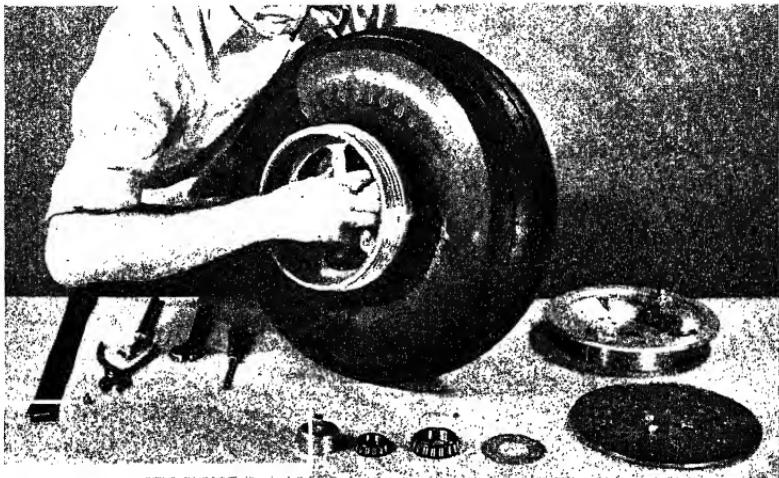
Rotating the inboard part until all bolts and bolt holes register
